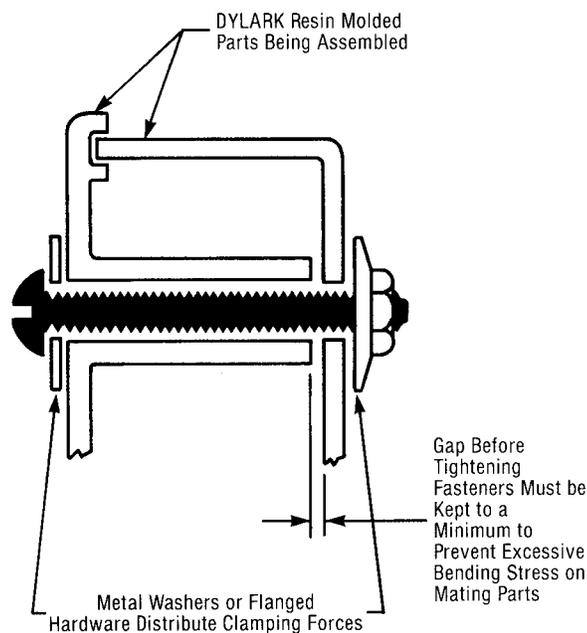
Bolted assembly, Dylark styrene maleic anhydride copolymer.
